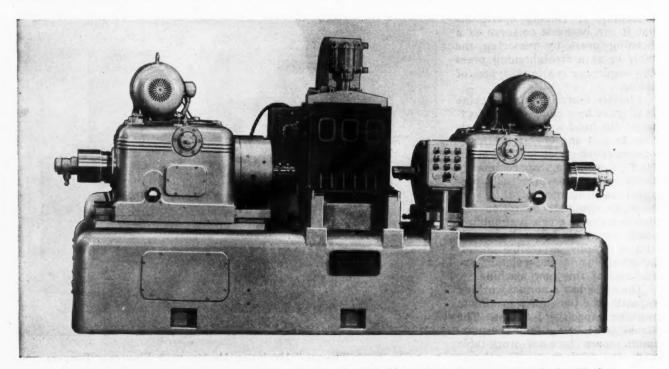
Machine Developed by the Cross Co. for Straddle-facing Main Bearings of Cylinder Blocks
